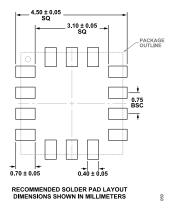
PCB Footprint Pattern and Dimensions in Millimeters
